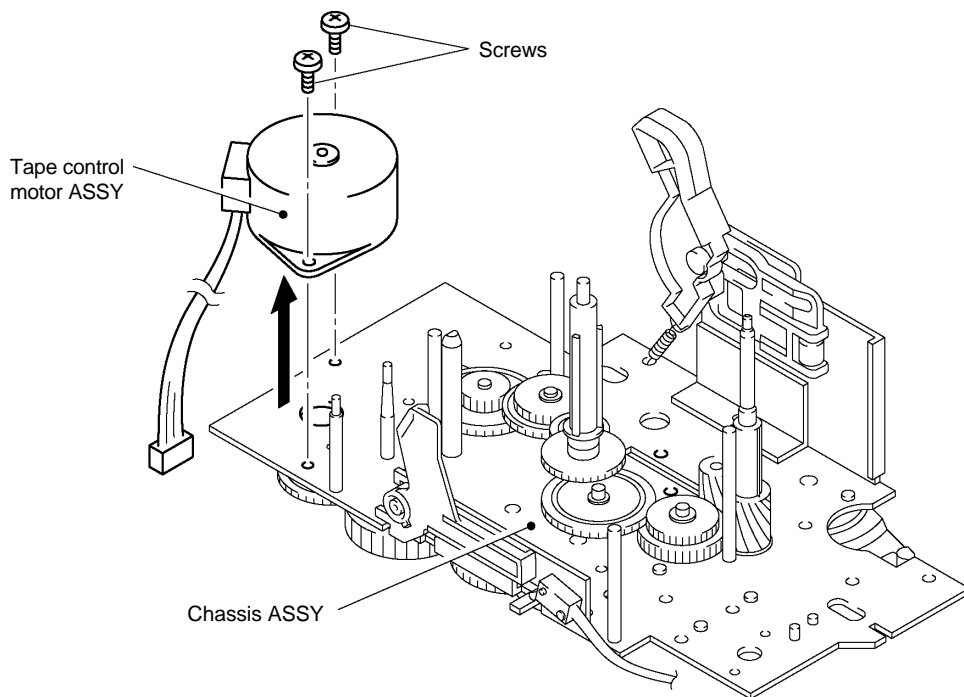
Removing the Tape Control Motor ASSY
